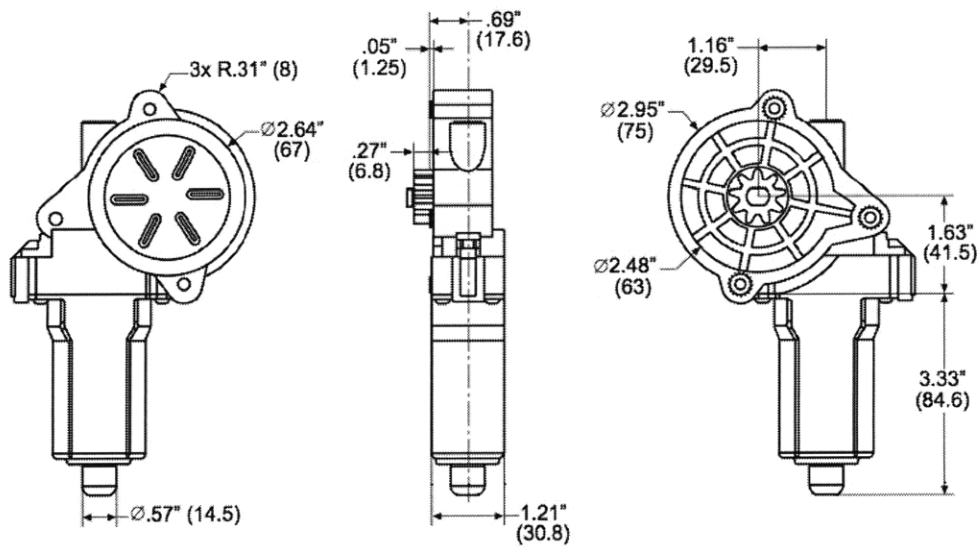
AME 10 N-m Motor Dimensions [4]
